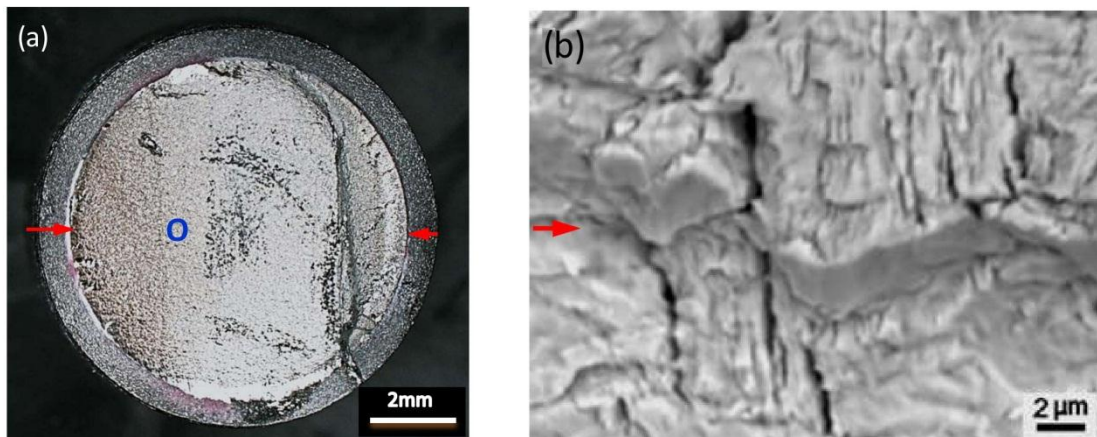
Optical fractograph (a) and SEM micro-fractograph (b) of the bolt only sample in bottom view
